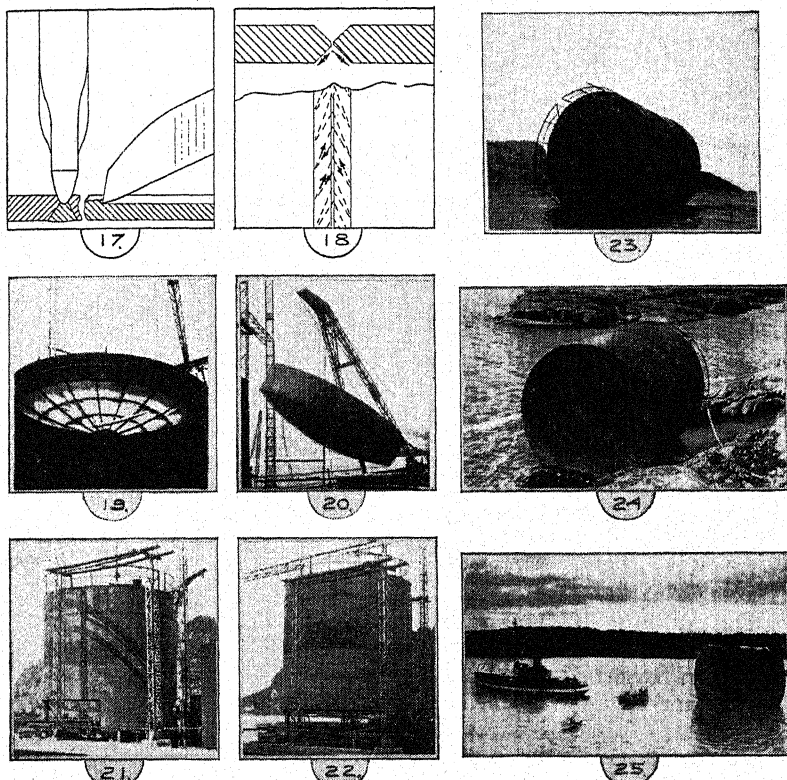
Chipping chisel. Fig. 18. Oscillating manner of making vertical welds. Fig. 19. Dome fabricated upside down. Fig. 20. Dome of tank turned over. Fig. 21. Tank nearly completed. Fig. 22. Five strakes of shell in place. Fig. 23. Tank afloat after beaching. Fig. 24. Tank beached after brecking tow. Fig. 25. Tank under tow.
